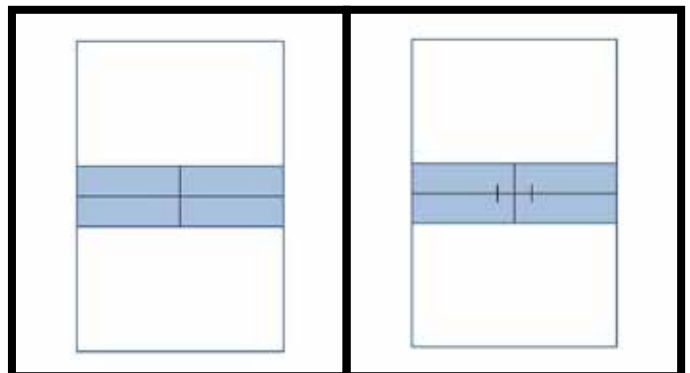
Place shrink tubing over the solder connections and seal into place.
